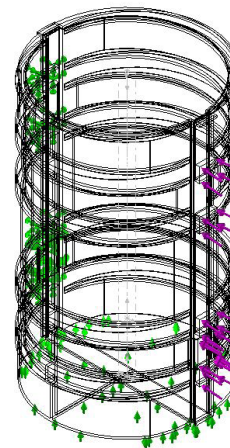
Scenario: Sea transport, assembly. Green arrows: fixed geometry of the left flange and roller/slider of the bottom. Purple arrows: Force of colliding drums
